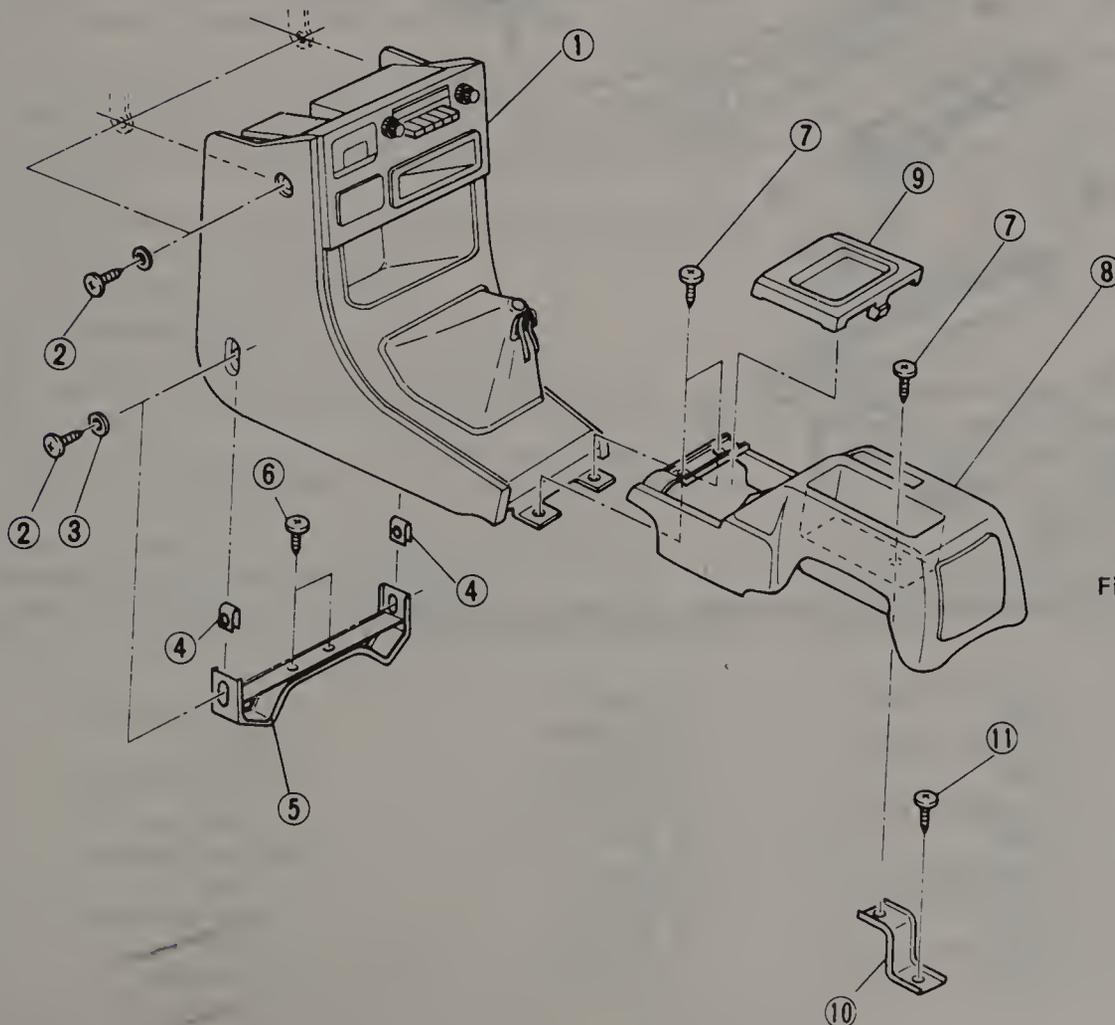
Radio console and parking brake components (style B) – exploded view (Sec 30)
